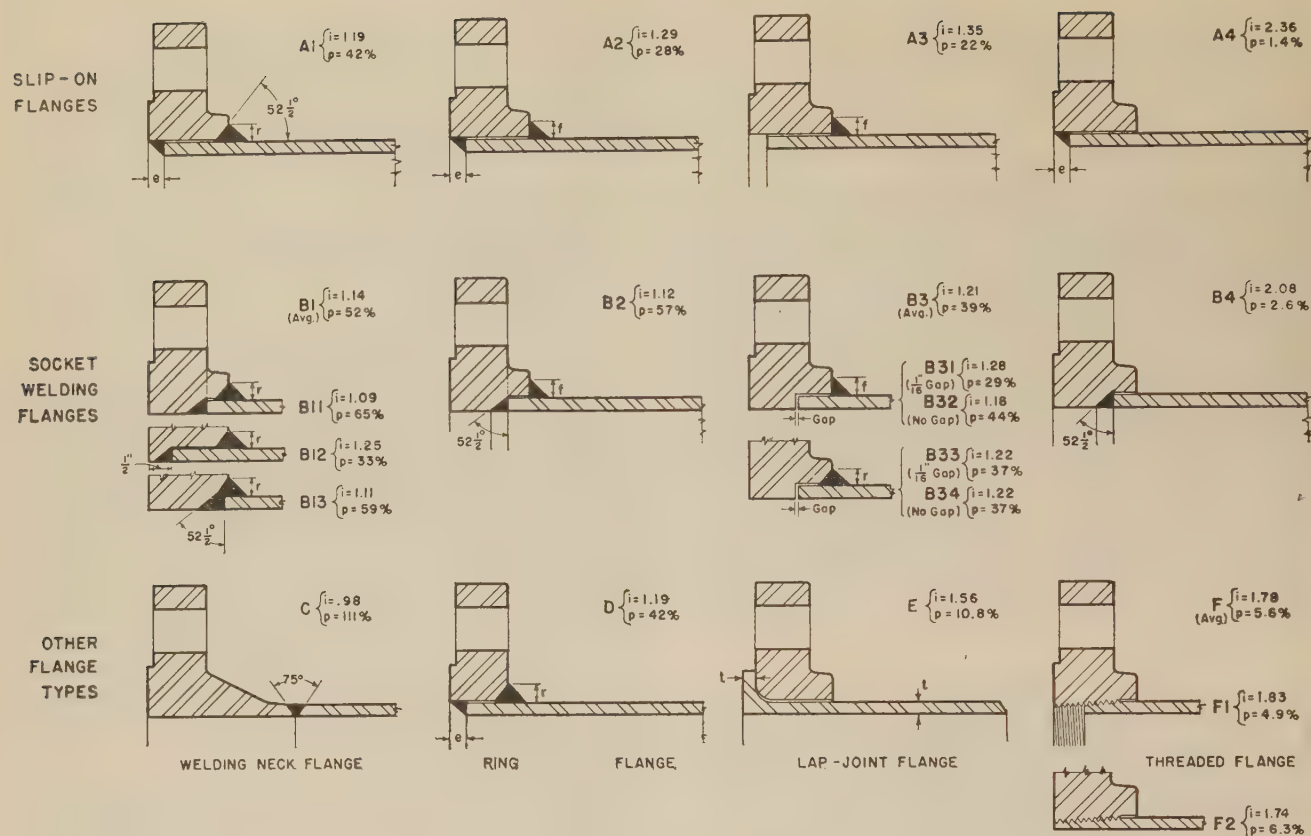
DETAILS OF FLANGES AND VARIANTS OF FLANGE ATTACHMENT TESTED IN MAIN SERIES
